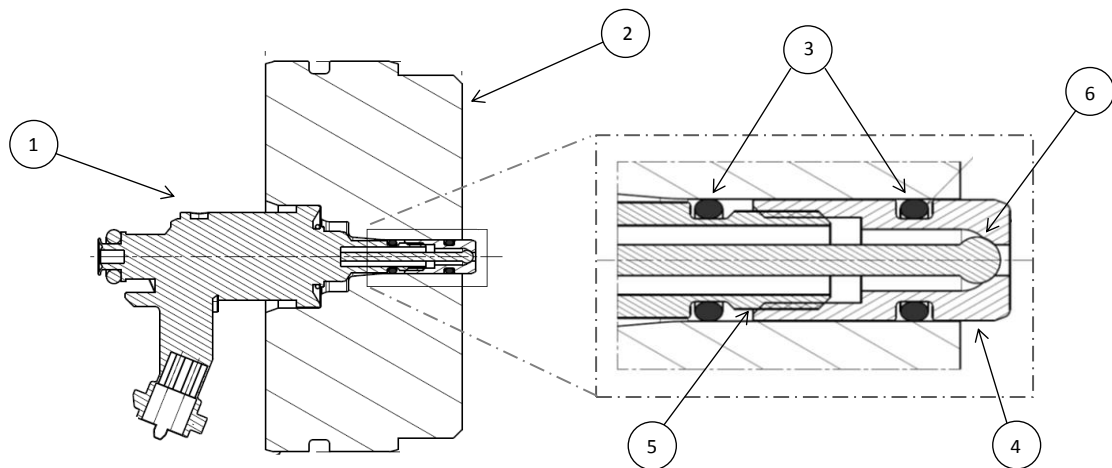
, Modified gasoline fuel injector assembly and enlarged view of adapted tip where: 1. Fuel injector, 2. Injector adapter, 3. O-ring, 4. New tip, 5. Thread location and 6. Sealing surface.
